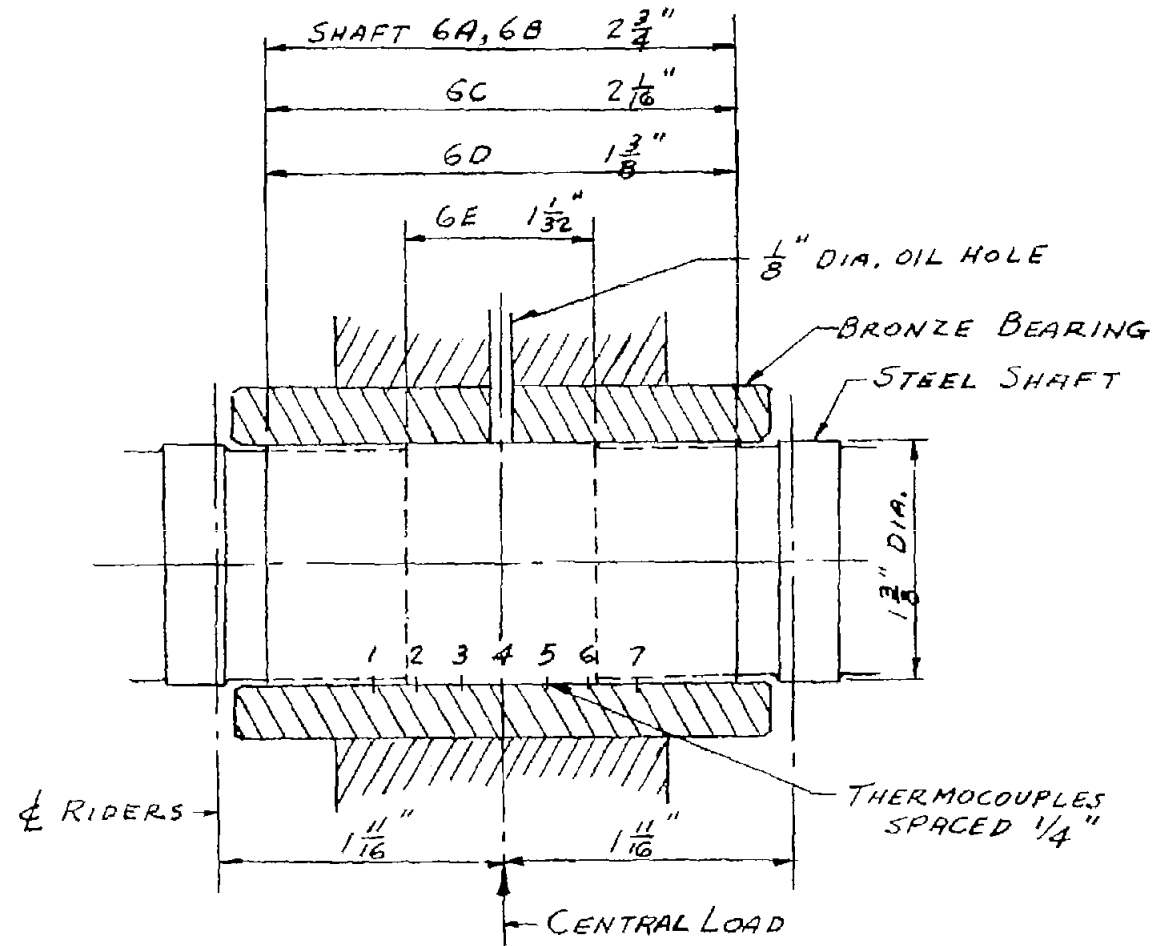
Configuration of test bearing and test shaft showing location of oil hole and displacement-measuring riders.
